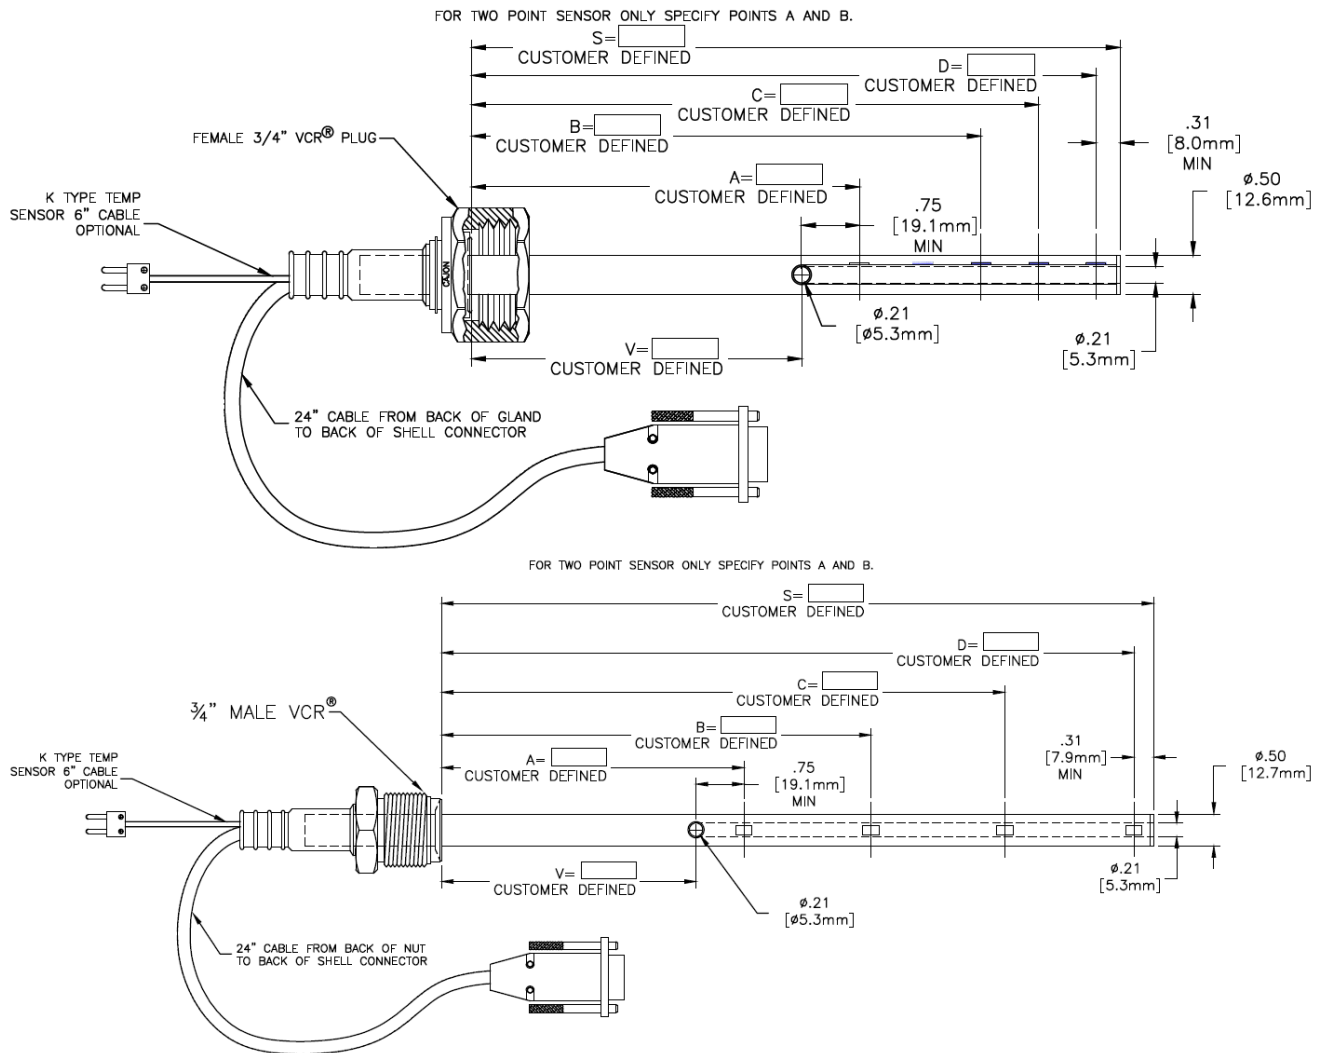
SL-900 series with 1/2" OD tube. The top drawing shows a 3/4" female VCR® fitting while the bottom drawing shows a 3/4" male VCR® fitting.
